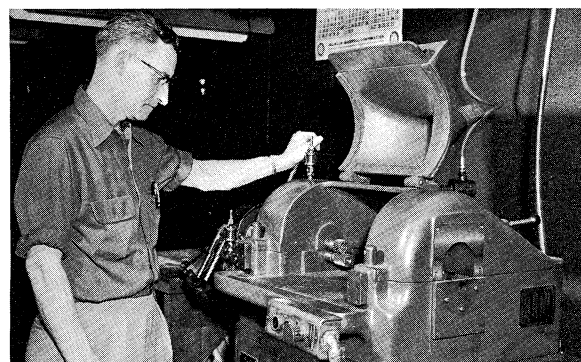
Sound-testing of transmission gears in a sound-proof room. *Courtesy Warner Gear Div.
